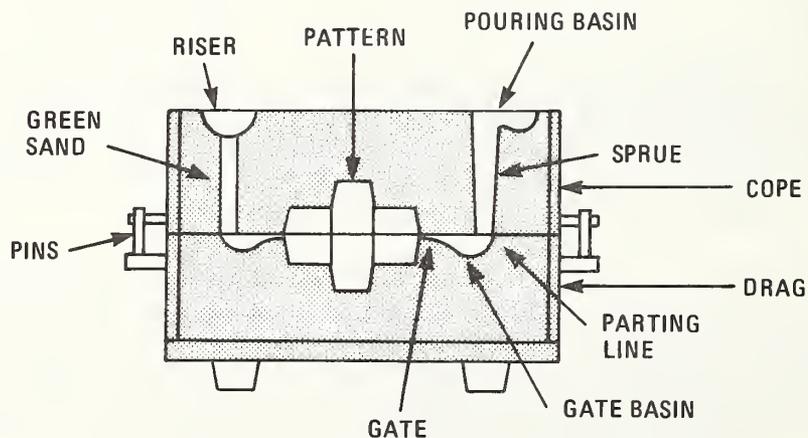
GREEN SAND MOLD READY FOR CASTING
